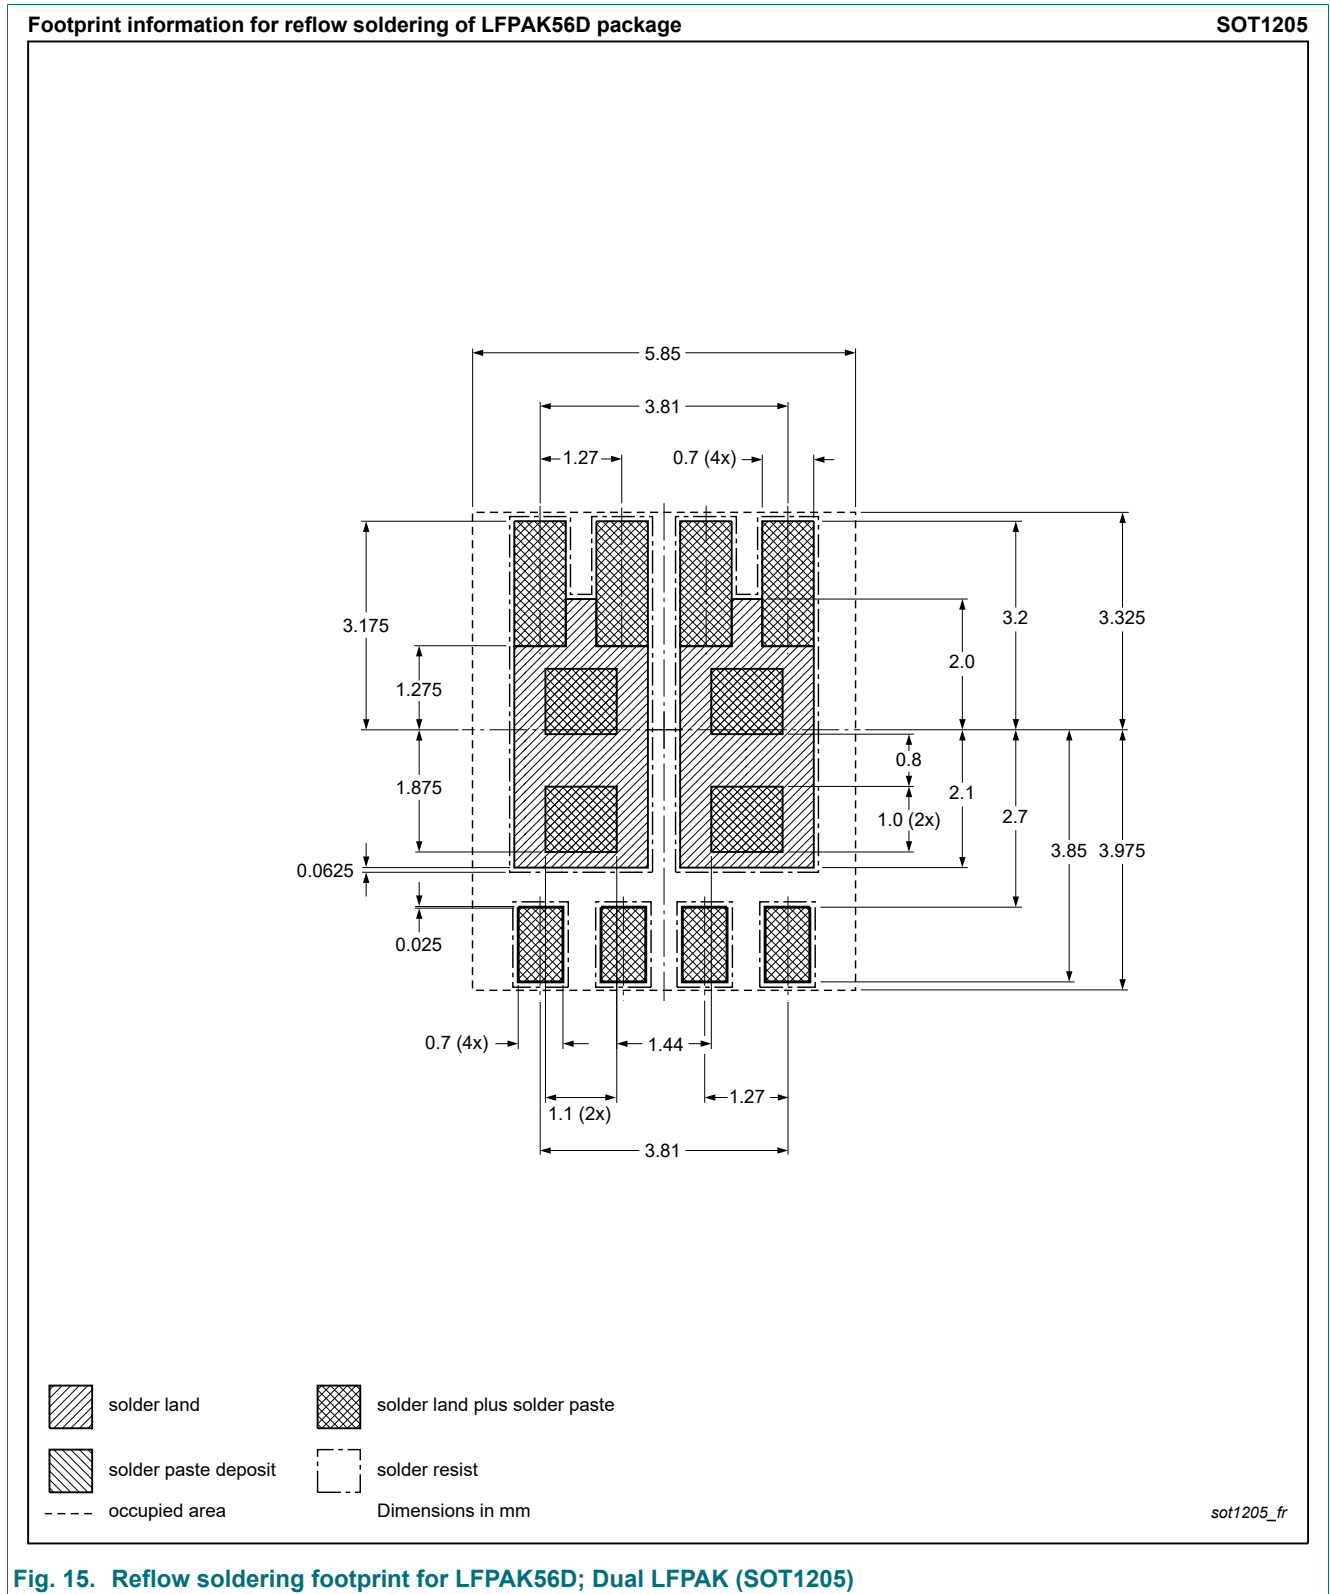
Reflow soldering footprint for LFPAK56D; Dual LFPAK (SOT1205)
